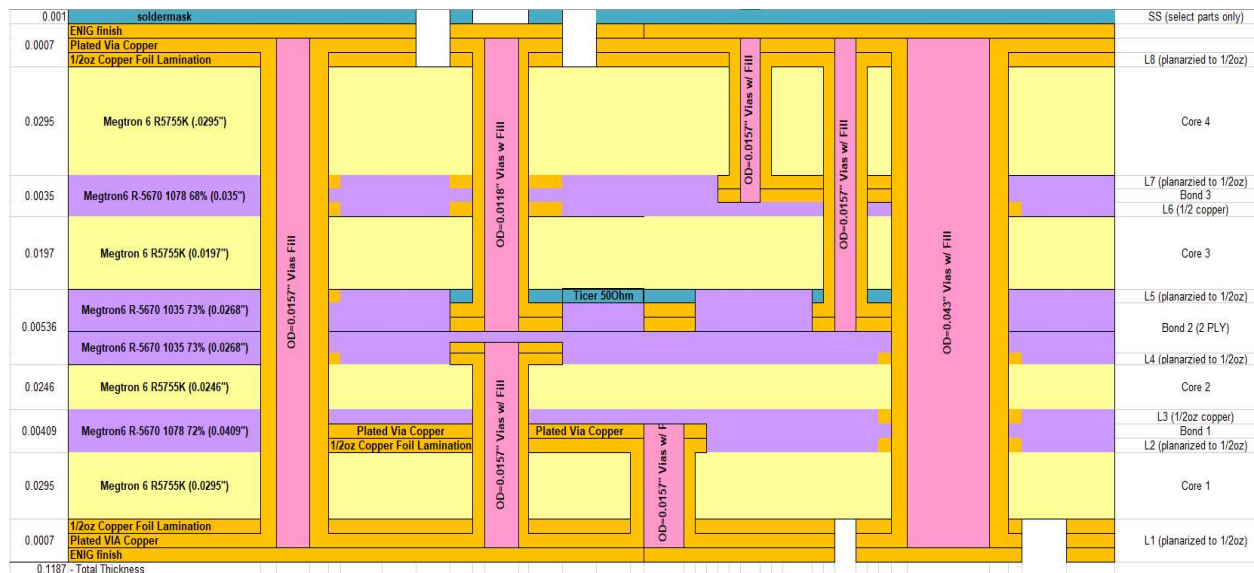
Radial combiner design stack-up based on standard printed circuit board manufacturing.
